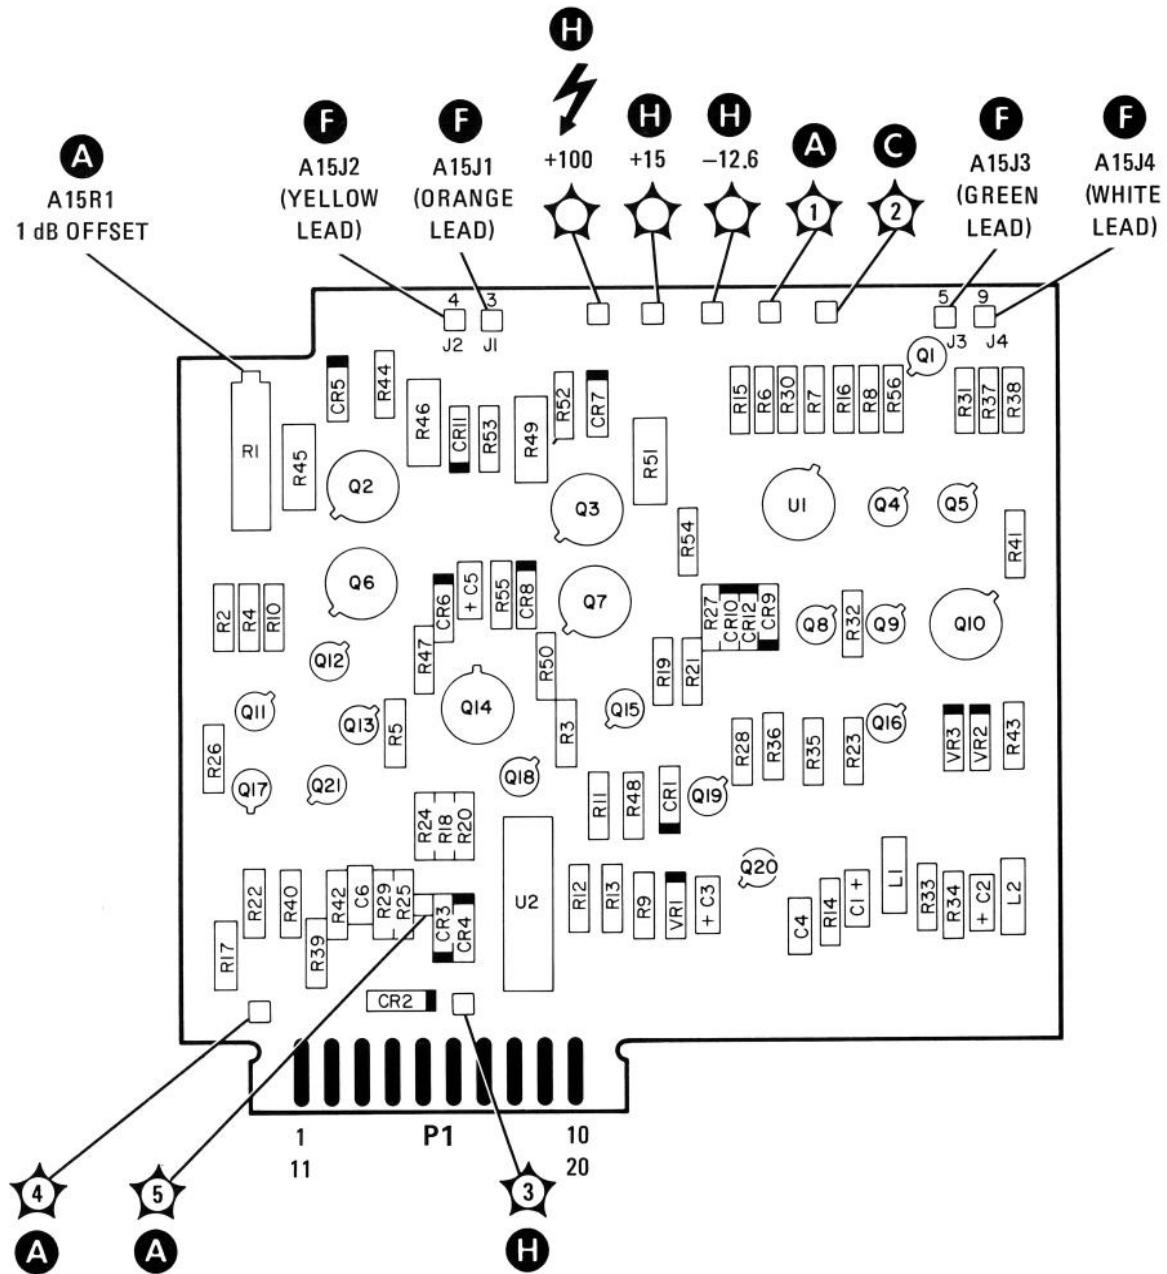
A15 VERTICAL DRIVER AND BLANKING ASSEMBLY, COMPONENT LOCATIONS
